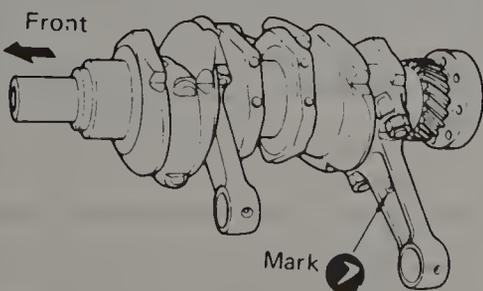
The connecting rods must be installed with the mark facing the front of the crankshaft (Sec 25)
